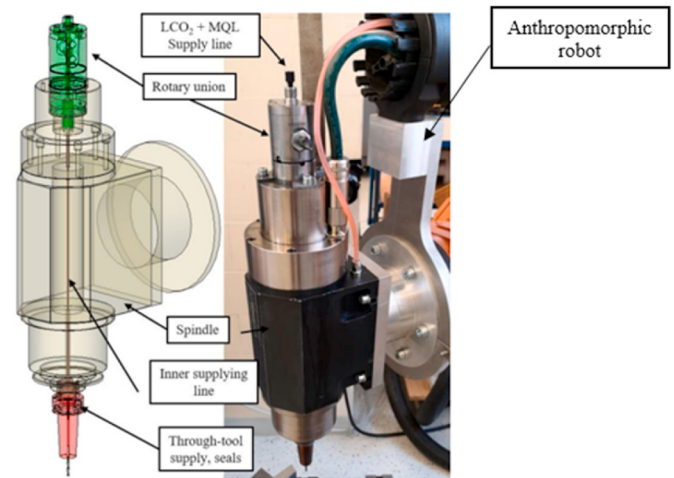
Modified spindle and tool structure for internal lubrication (LCO₂+MQL) [67].
